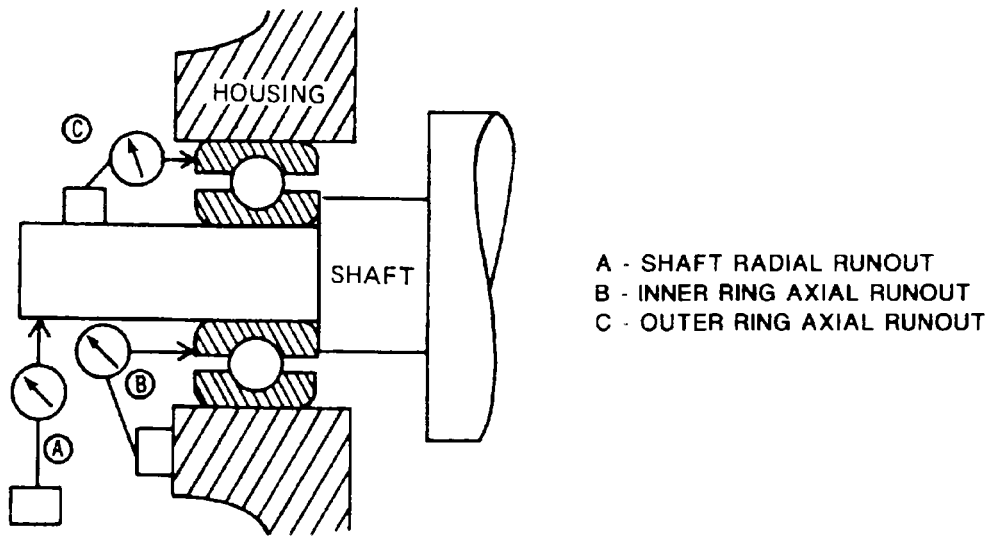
Measurement Location for Determining Bearing Axial Runout and Shaft Radial Runout
